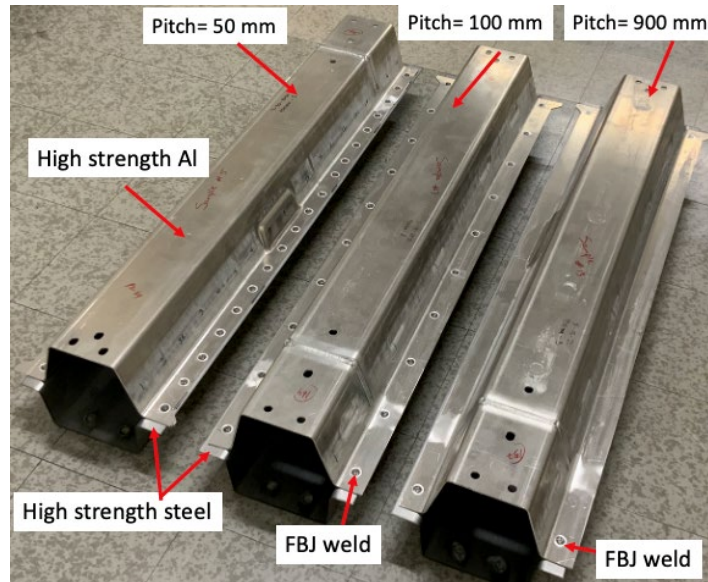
Demonstrated prototype parts 950 mm long with different FBJ weld pitches (e.g., 50, 100, 900 mm) received at ORNL. Source: ORNL.
